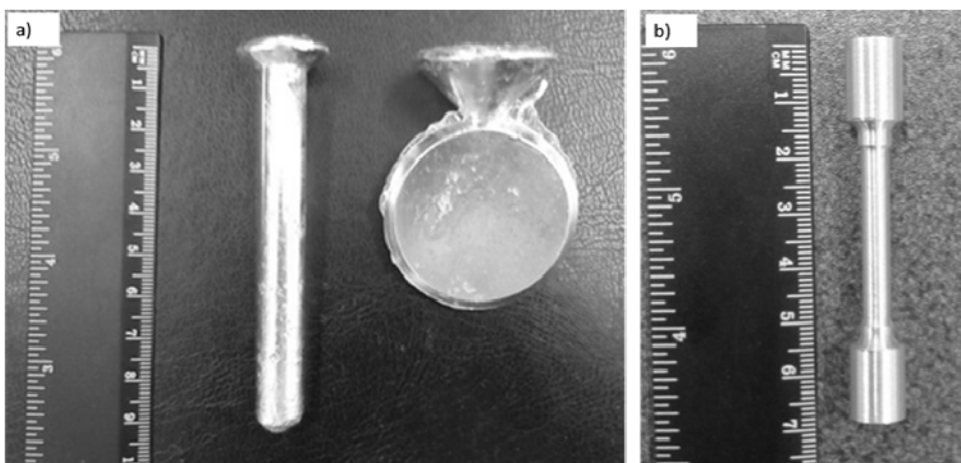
Casted tensile test piece and coin test piece (a), machined tensile test piece (b)
